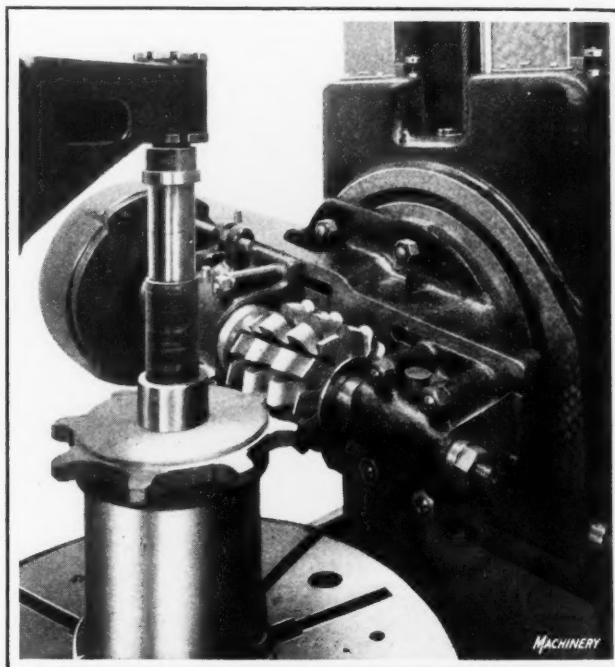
The Hob and Work mounted on the Hobbing Machine
